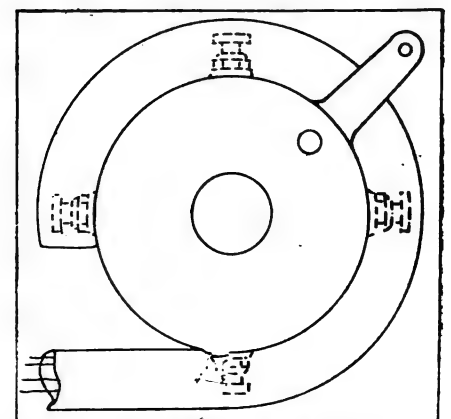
Suggestion for Method of Insulating Ford Car Timer.
